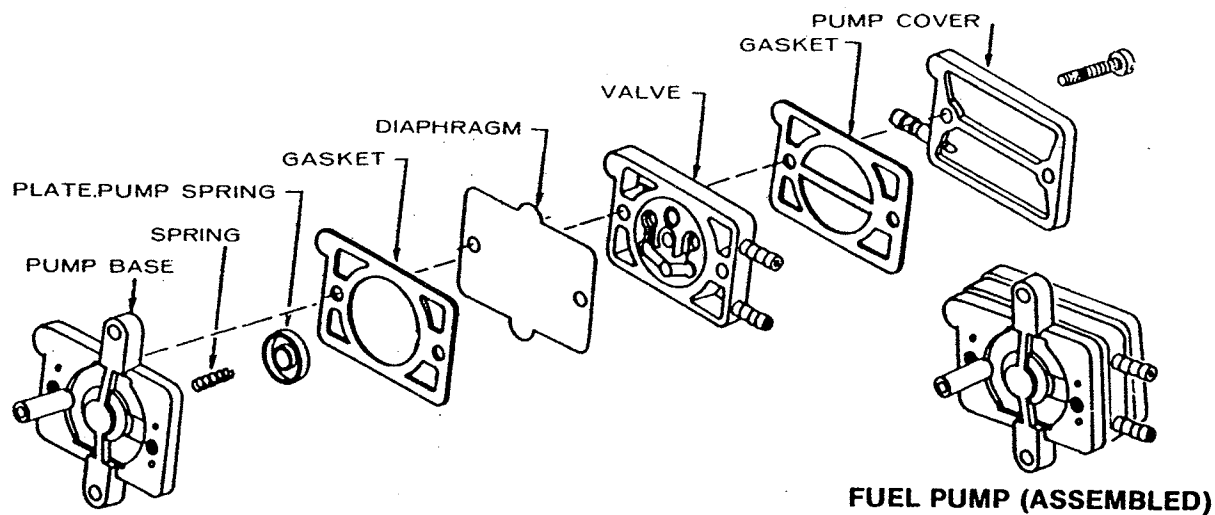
A. EXPLODED VIEW OF FUEL PUMP
